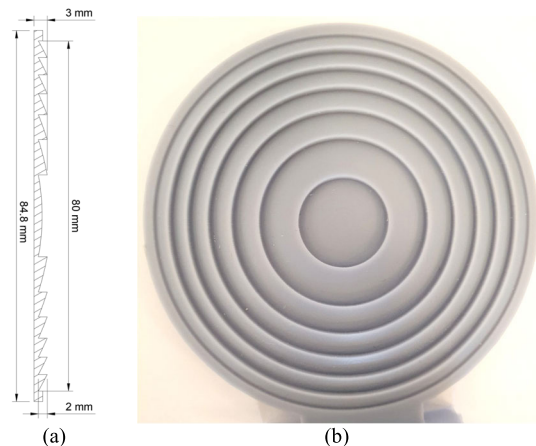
Hyperbolic aspherical plano-convex Fresnel lens: (a) cross-sectional CAD drawing; and (b) photograph.
